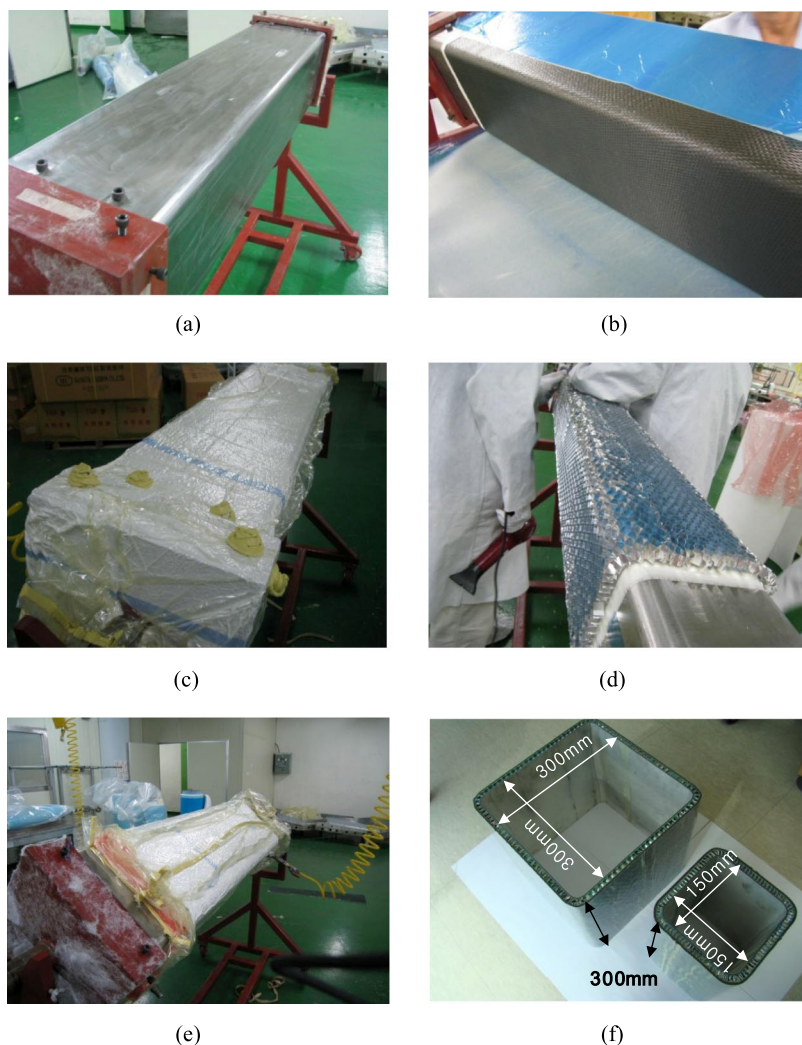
Manufacturing process of the composite sandwich tube structure: (a) steel mould; (b) lay-up of inner wall; (c) vacuuming process; (d) stacking of aluminium honeycomb core; (e) the vacuum bagged structure for the autoclave curing; (f) the cured square sandwich composite tubes. This figure is published in color in the online version.
